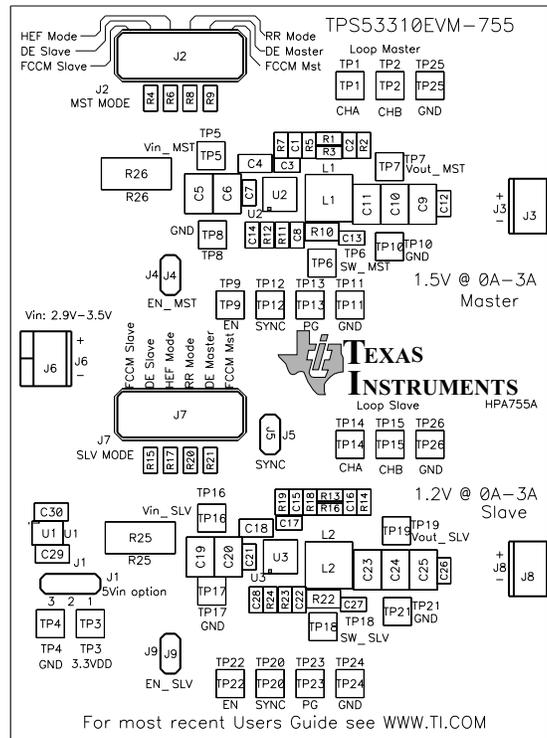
TPS53310EVM-755 Top Layer Assembly Drawing, Top View
